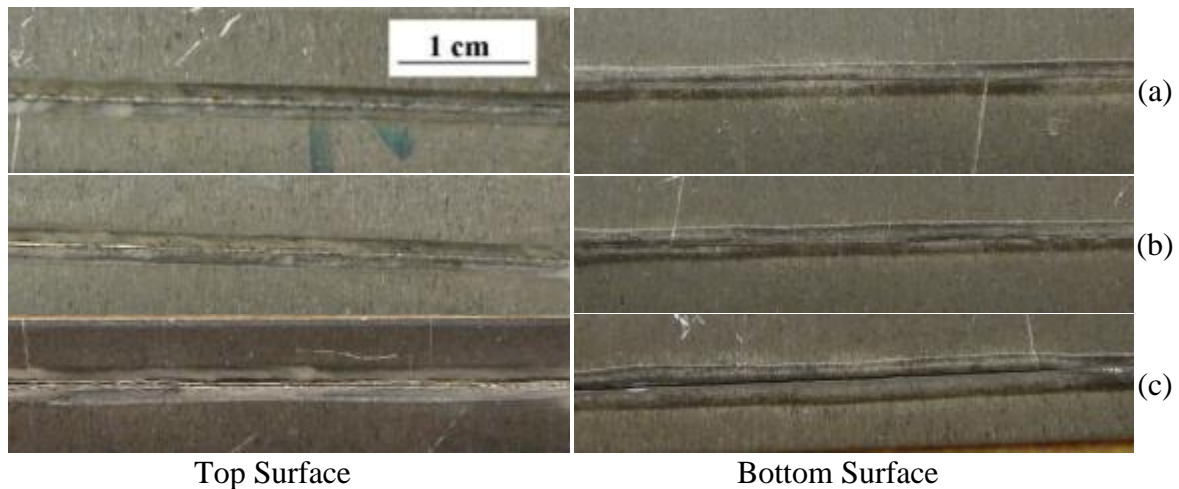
Diode laser weld top and bottom surfaces made at: a) 4 kW and 4 m/min, b) 3 kW and 3 m/min, and c) 2 kW and 2 m/min.
